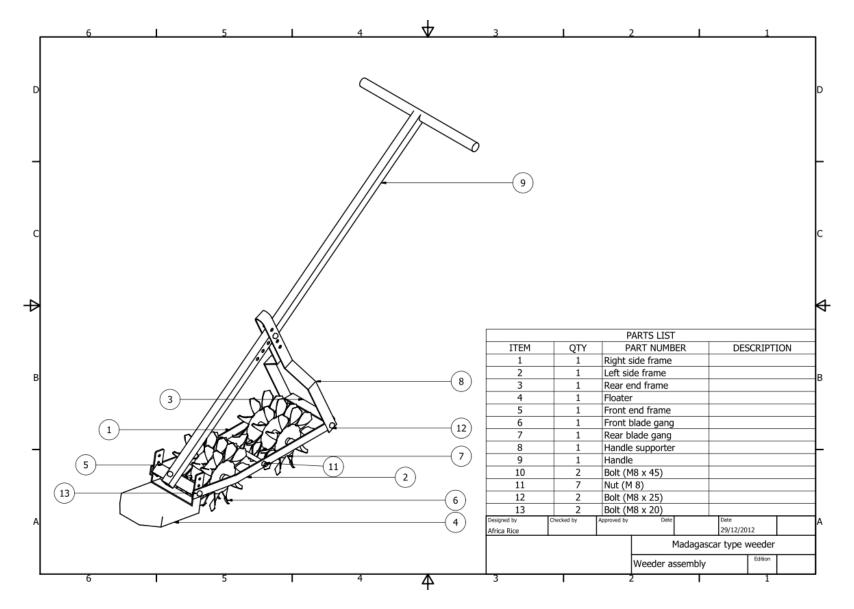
B: Technical drawing of the Twisted-Spike Floating Weeder assembly
